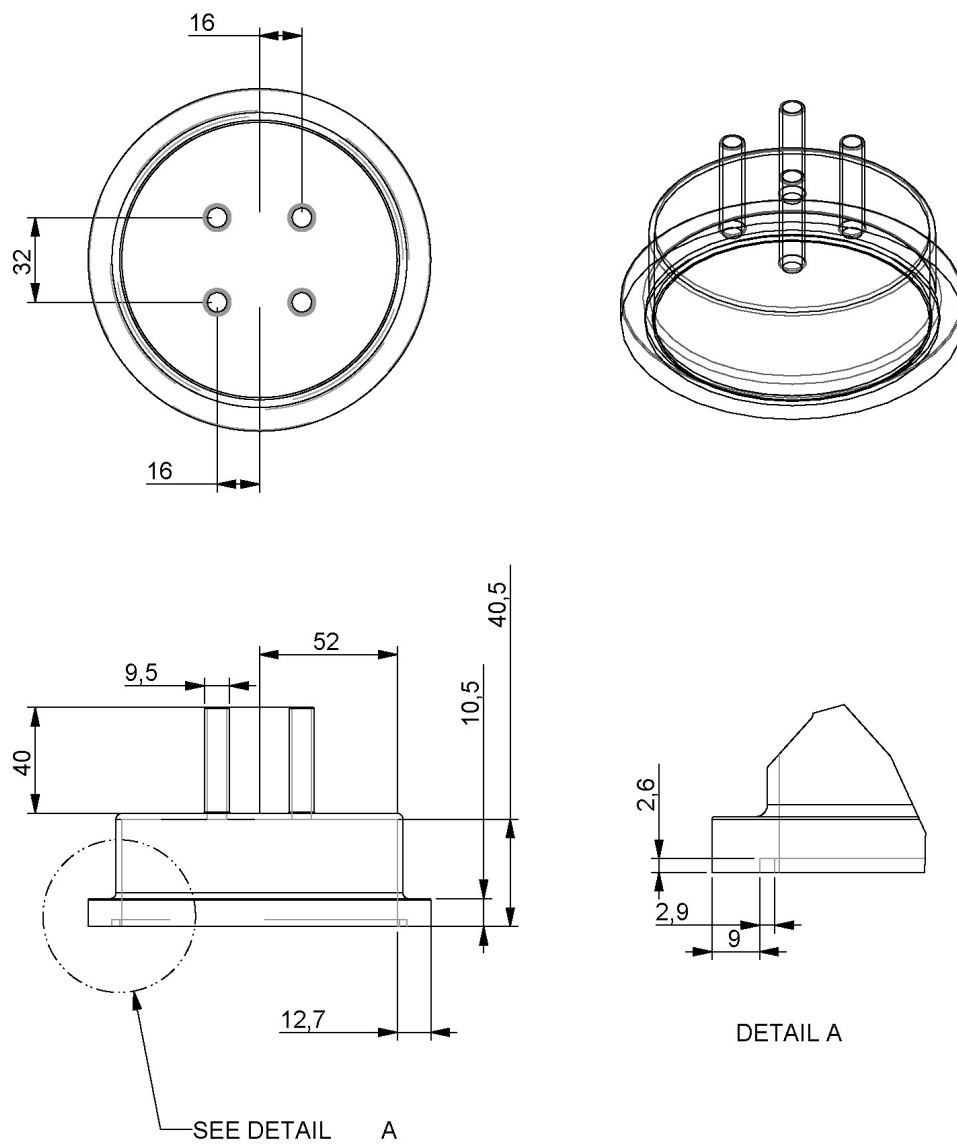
Technical drawing of the container's lid. All dimensions are in millimeters.
